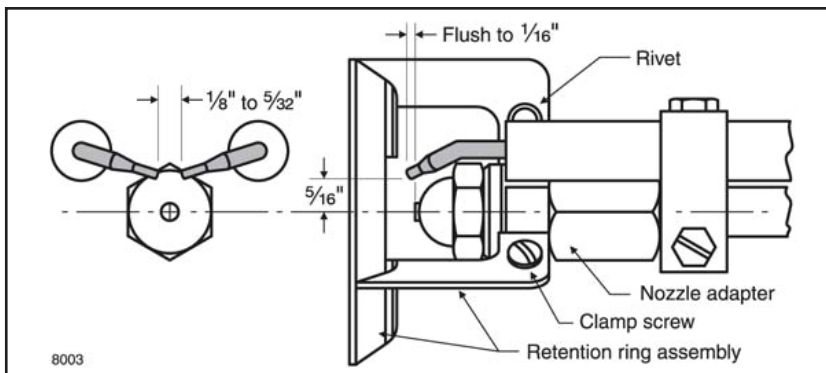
Electrode placement, retention ring assembly and nozzle adapter.
